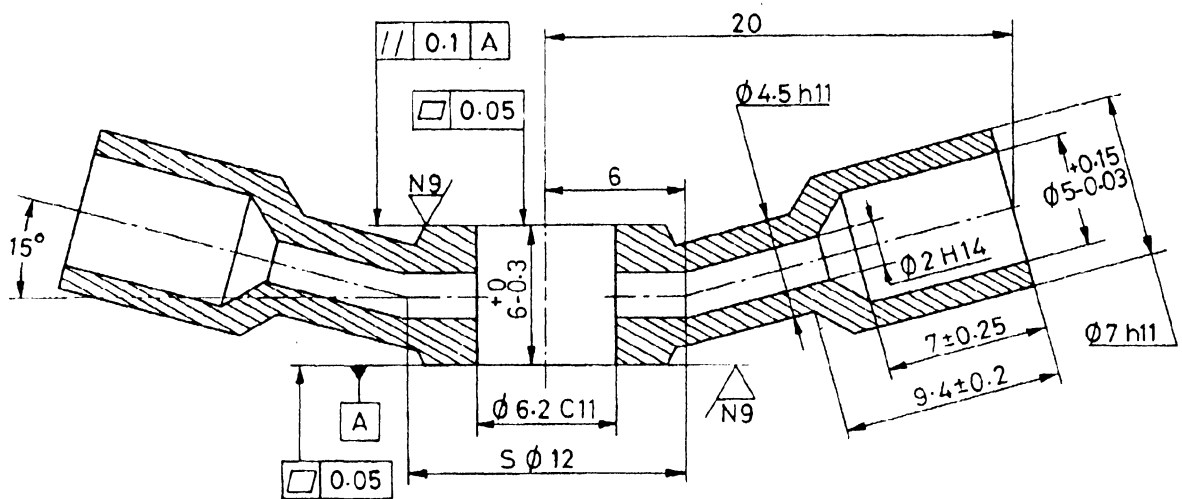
DIMENSIONS AND TOLERANCES OF BENT TYPE DOUBLE ENDED PIPE UNION
